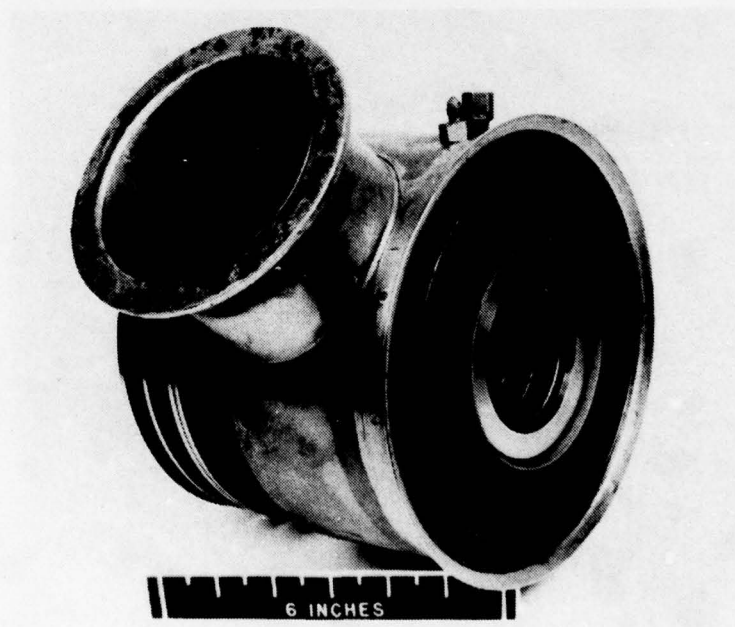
View of Combustor Housing Showing Exhaust Scroll Face Seal
